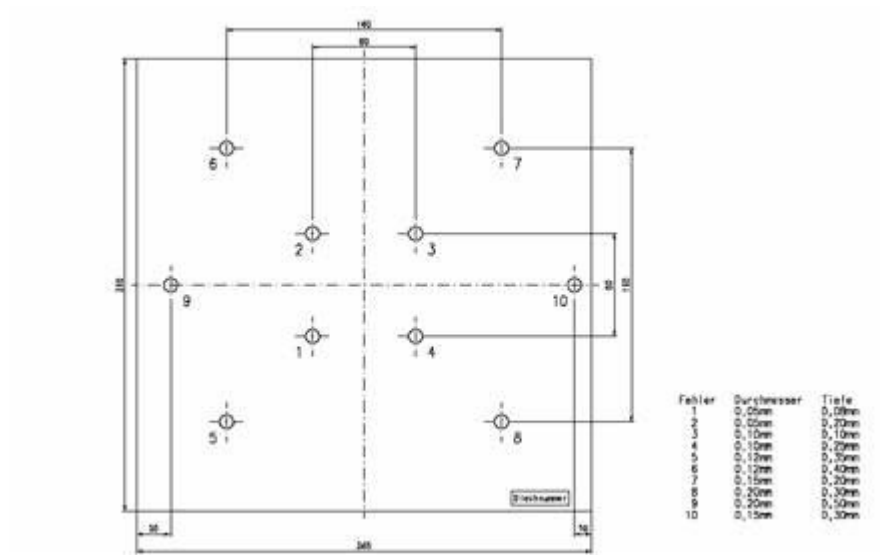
Drawing of niobium sheet with imbedded defects
